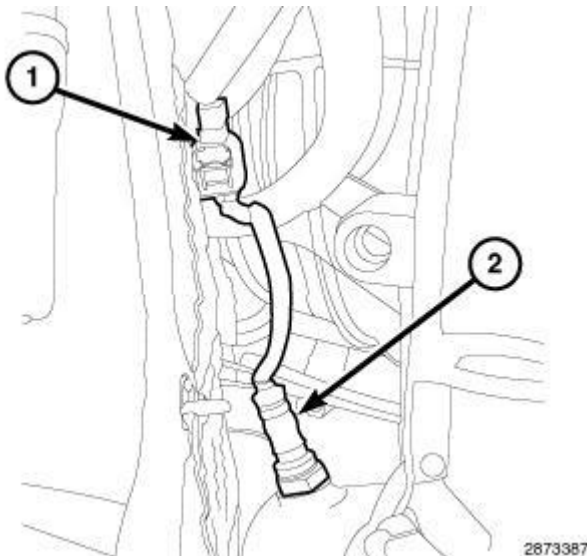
Right Upstream O2 Sensor & Electrical Connector
